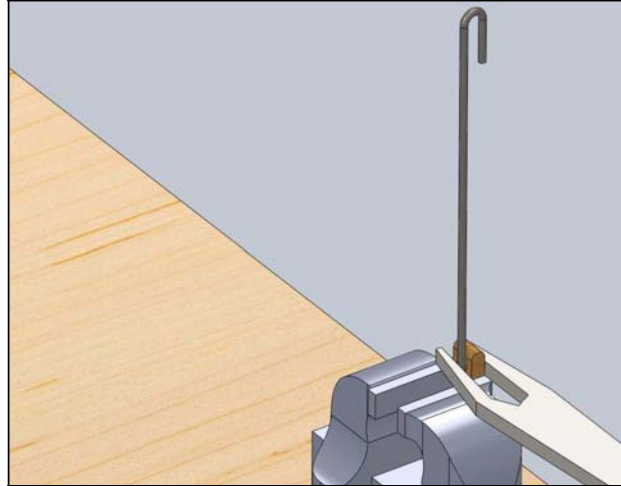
Bend #2- Position the rod so that that Bend #1 and Bend #2 will be in the same plane.
